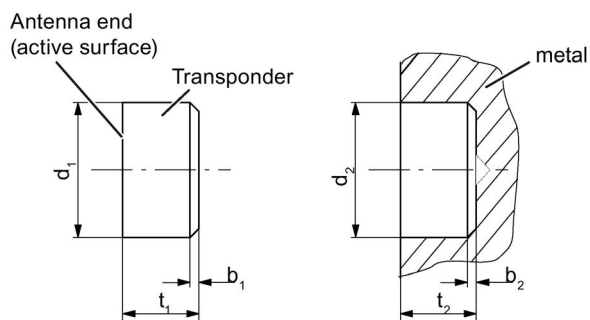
Flush-mounting of MDS D421/D521/E623 in metal with tools
